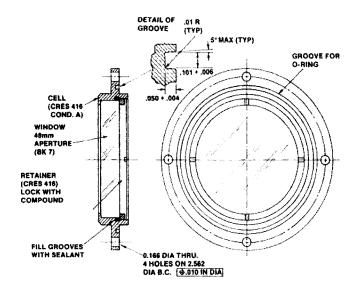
Higher optical performance glass window constrained by a threaded retaining ring and sealed with elastomer. Dimensions are in inches.
